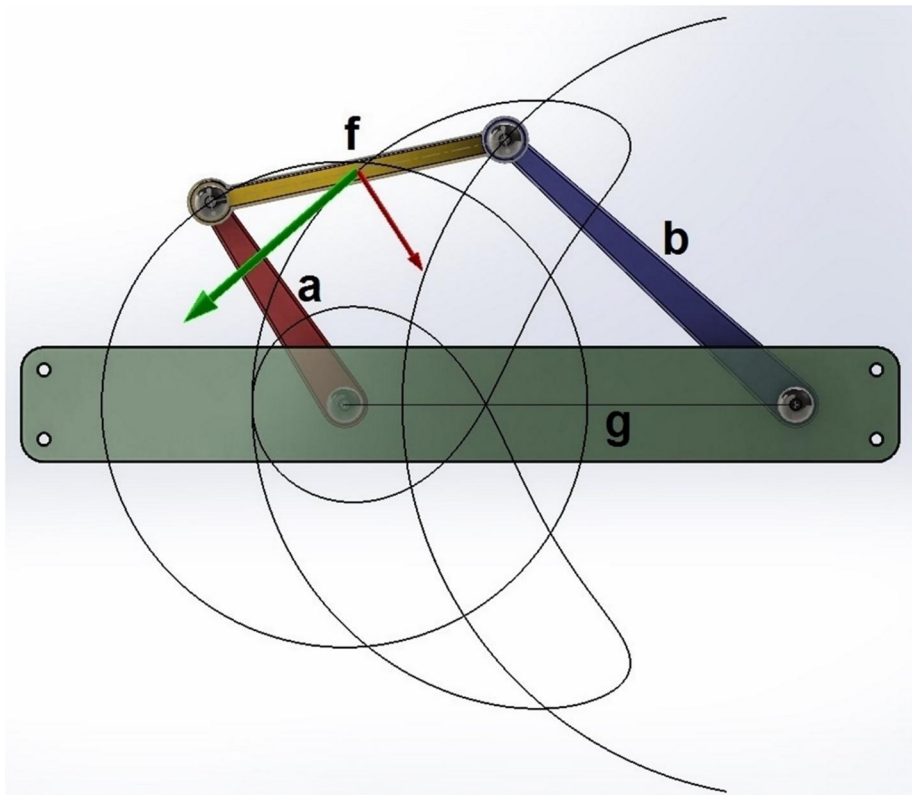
The assembly of crank π – rocker 4R linkage and trajectories of chosen points
